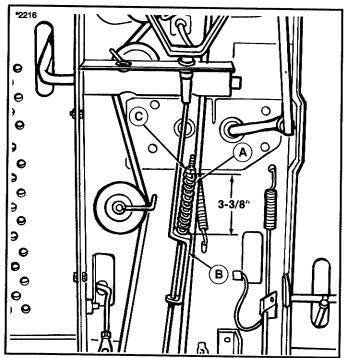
Brake Spring Adjustment - Hydro Models (Mfg. Nos. 1692156, 1692164)
